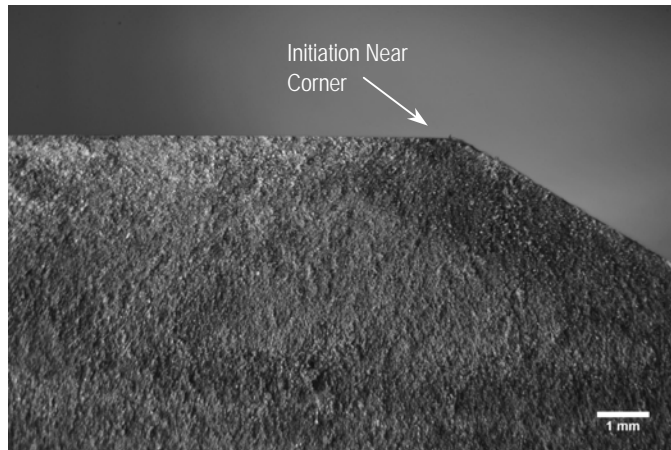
FRACTURE FACE OF LPB + SCC + ACTIVE CORROSION SAMPLE.
